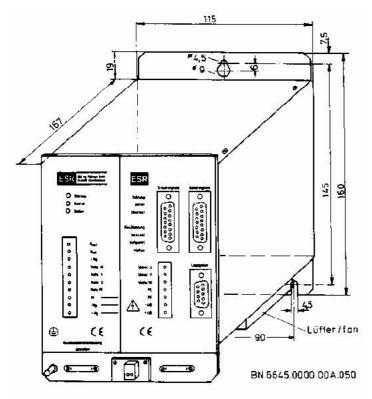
Servo amplifier in compact design, mounting dimensions (mm)
